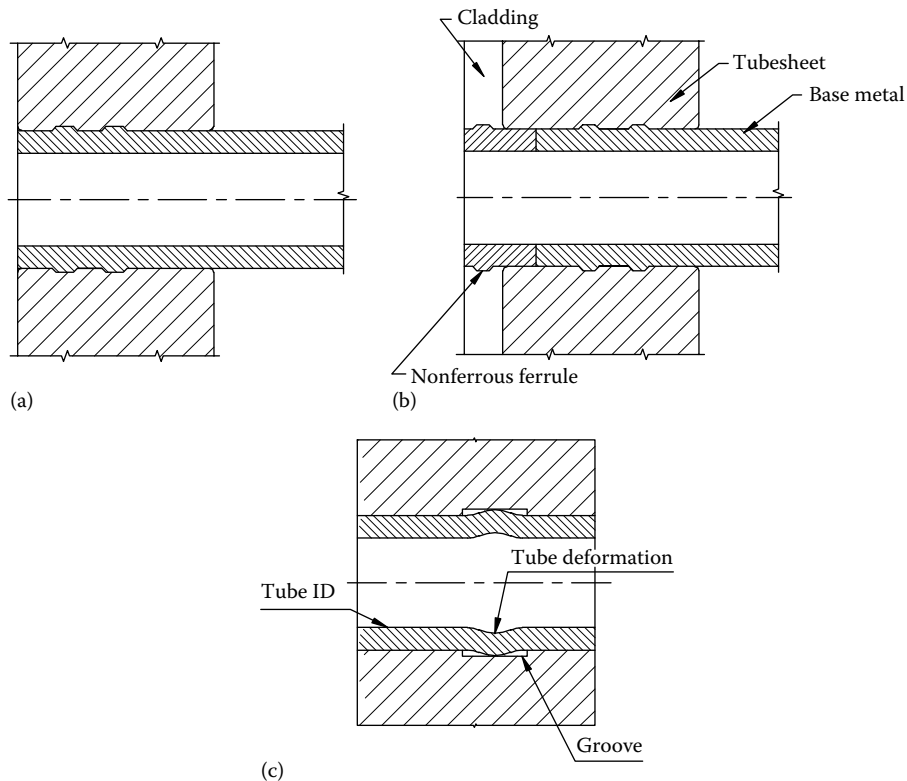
Tube-to-tubesheet joint RFs by annular groove. (a) Tubesheet with double grooves, (b) duplex tube and clad tubesheet, and (c) tubesheet with single groove.
